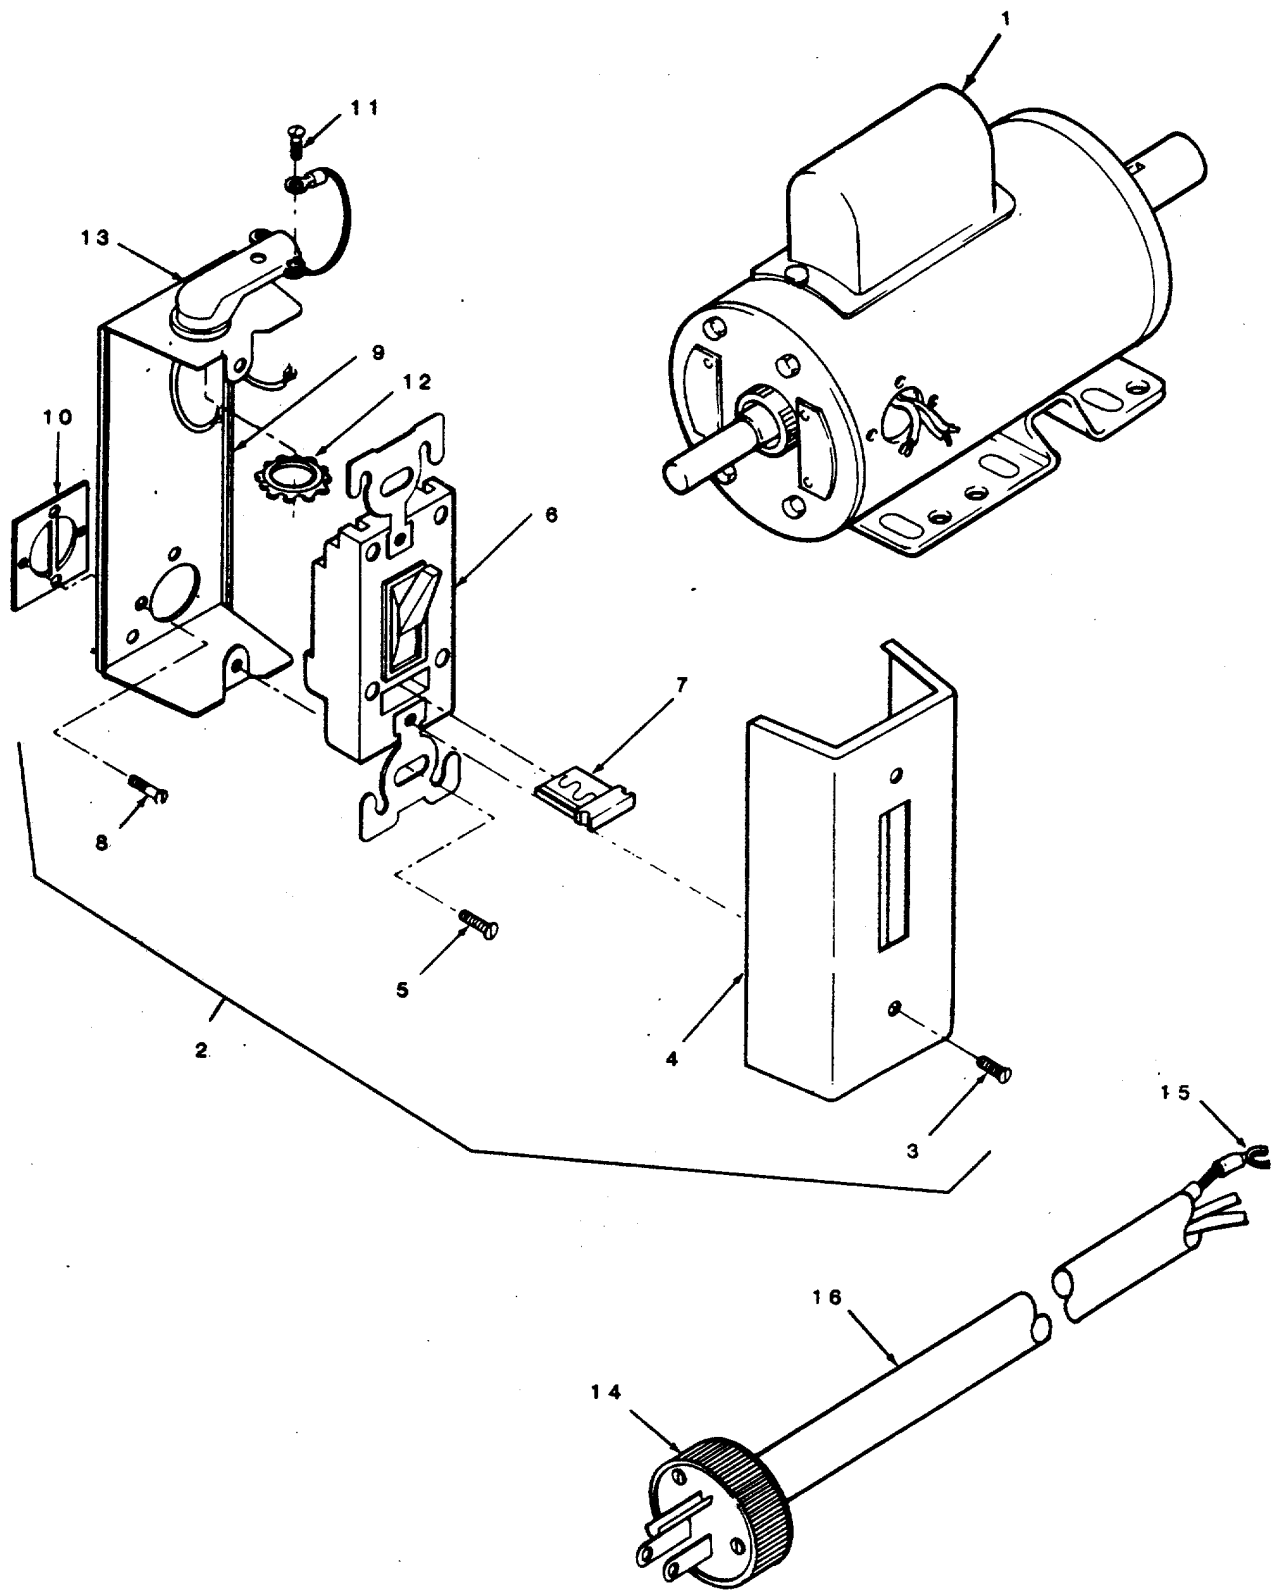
Electric Motor, Motor Starter Assembly and Cable Assembly
